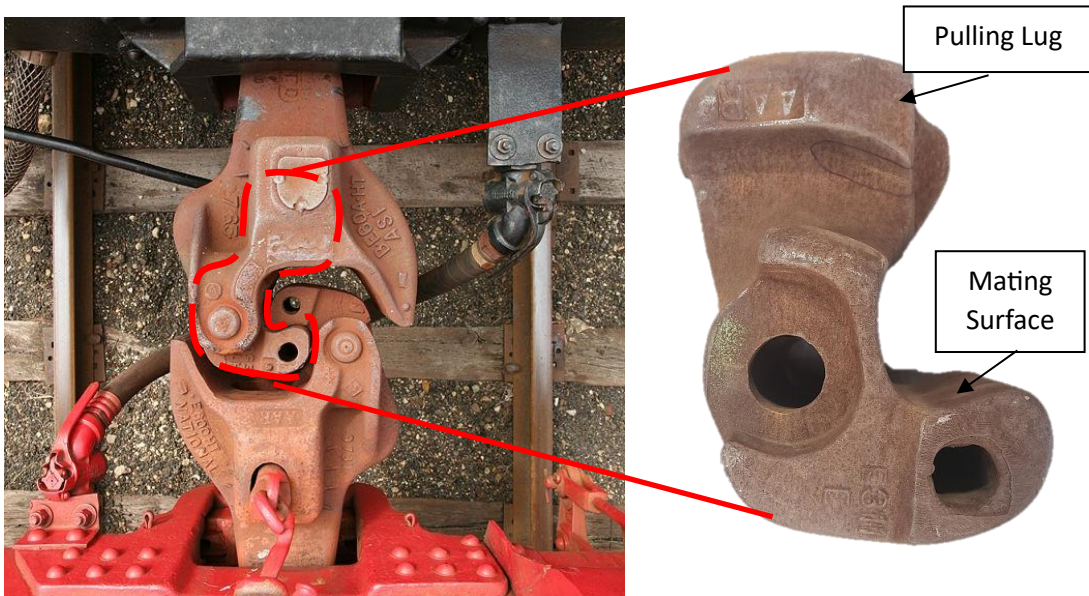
Two mating rail-car couplers [1] with the knuckles (outlined) mostly contained within the coupler (left). Full view of the knuckle (right).
